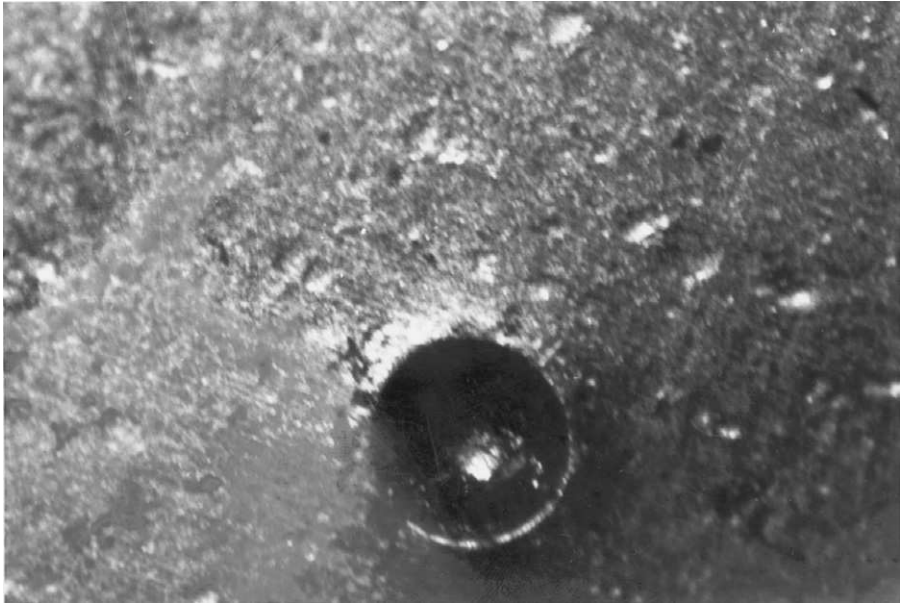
Enlarged view of a crater on the track surface of the inner race of a rolling-element bearing
